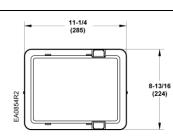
Dimensions of 599-10065 SKB\C Weather Shield in Inches (Millimeters).
